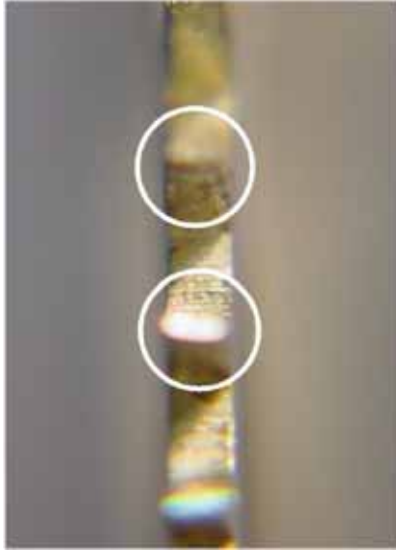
Looking through a loupe, machined teeth will show a bright tooth tip (bottom) while short teeth will be dark (top). Dark teeth indicate more machining is needed.
